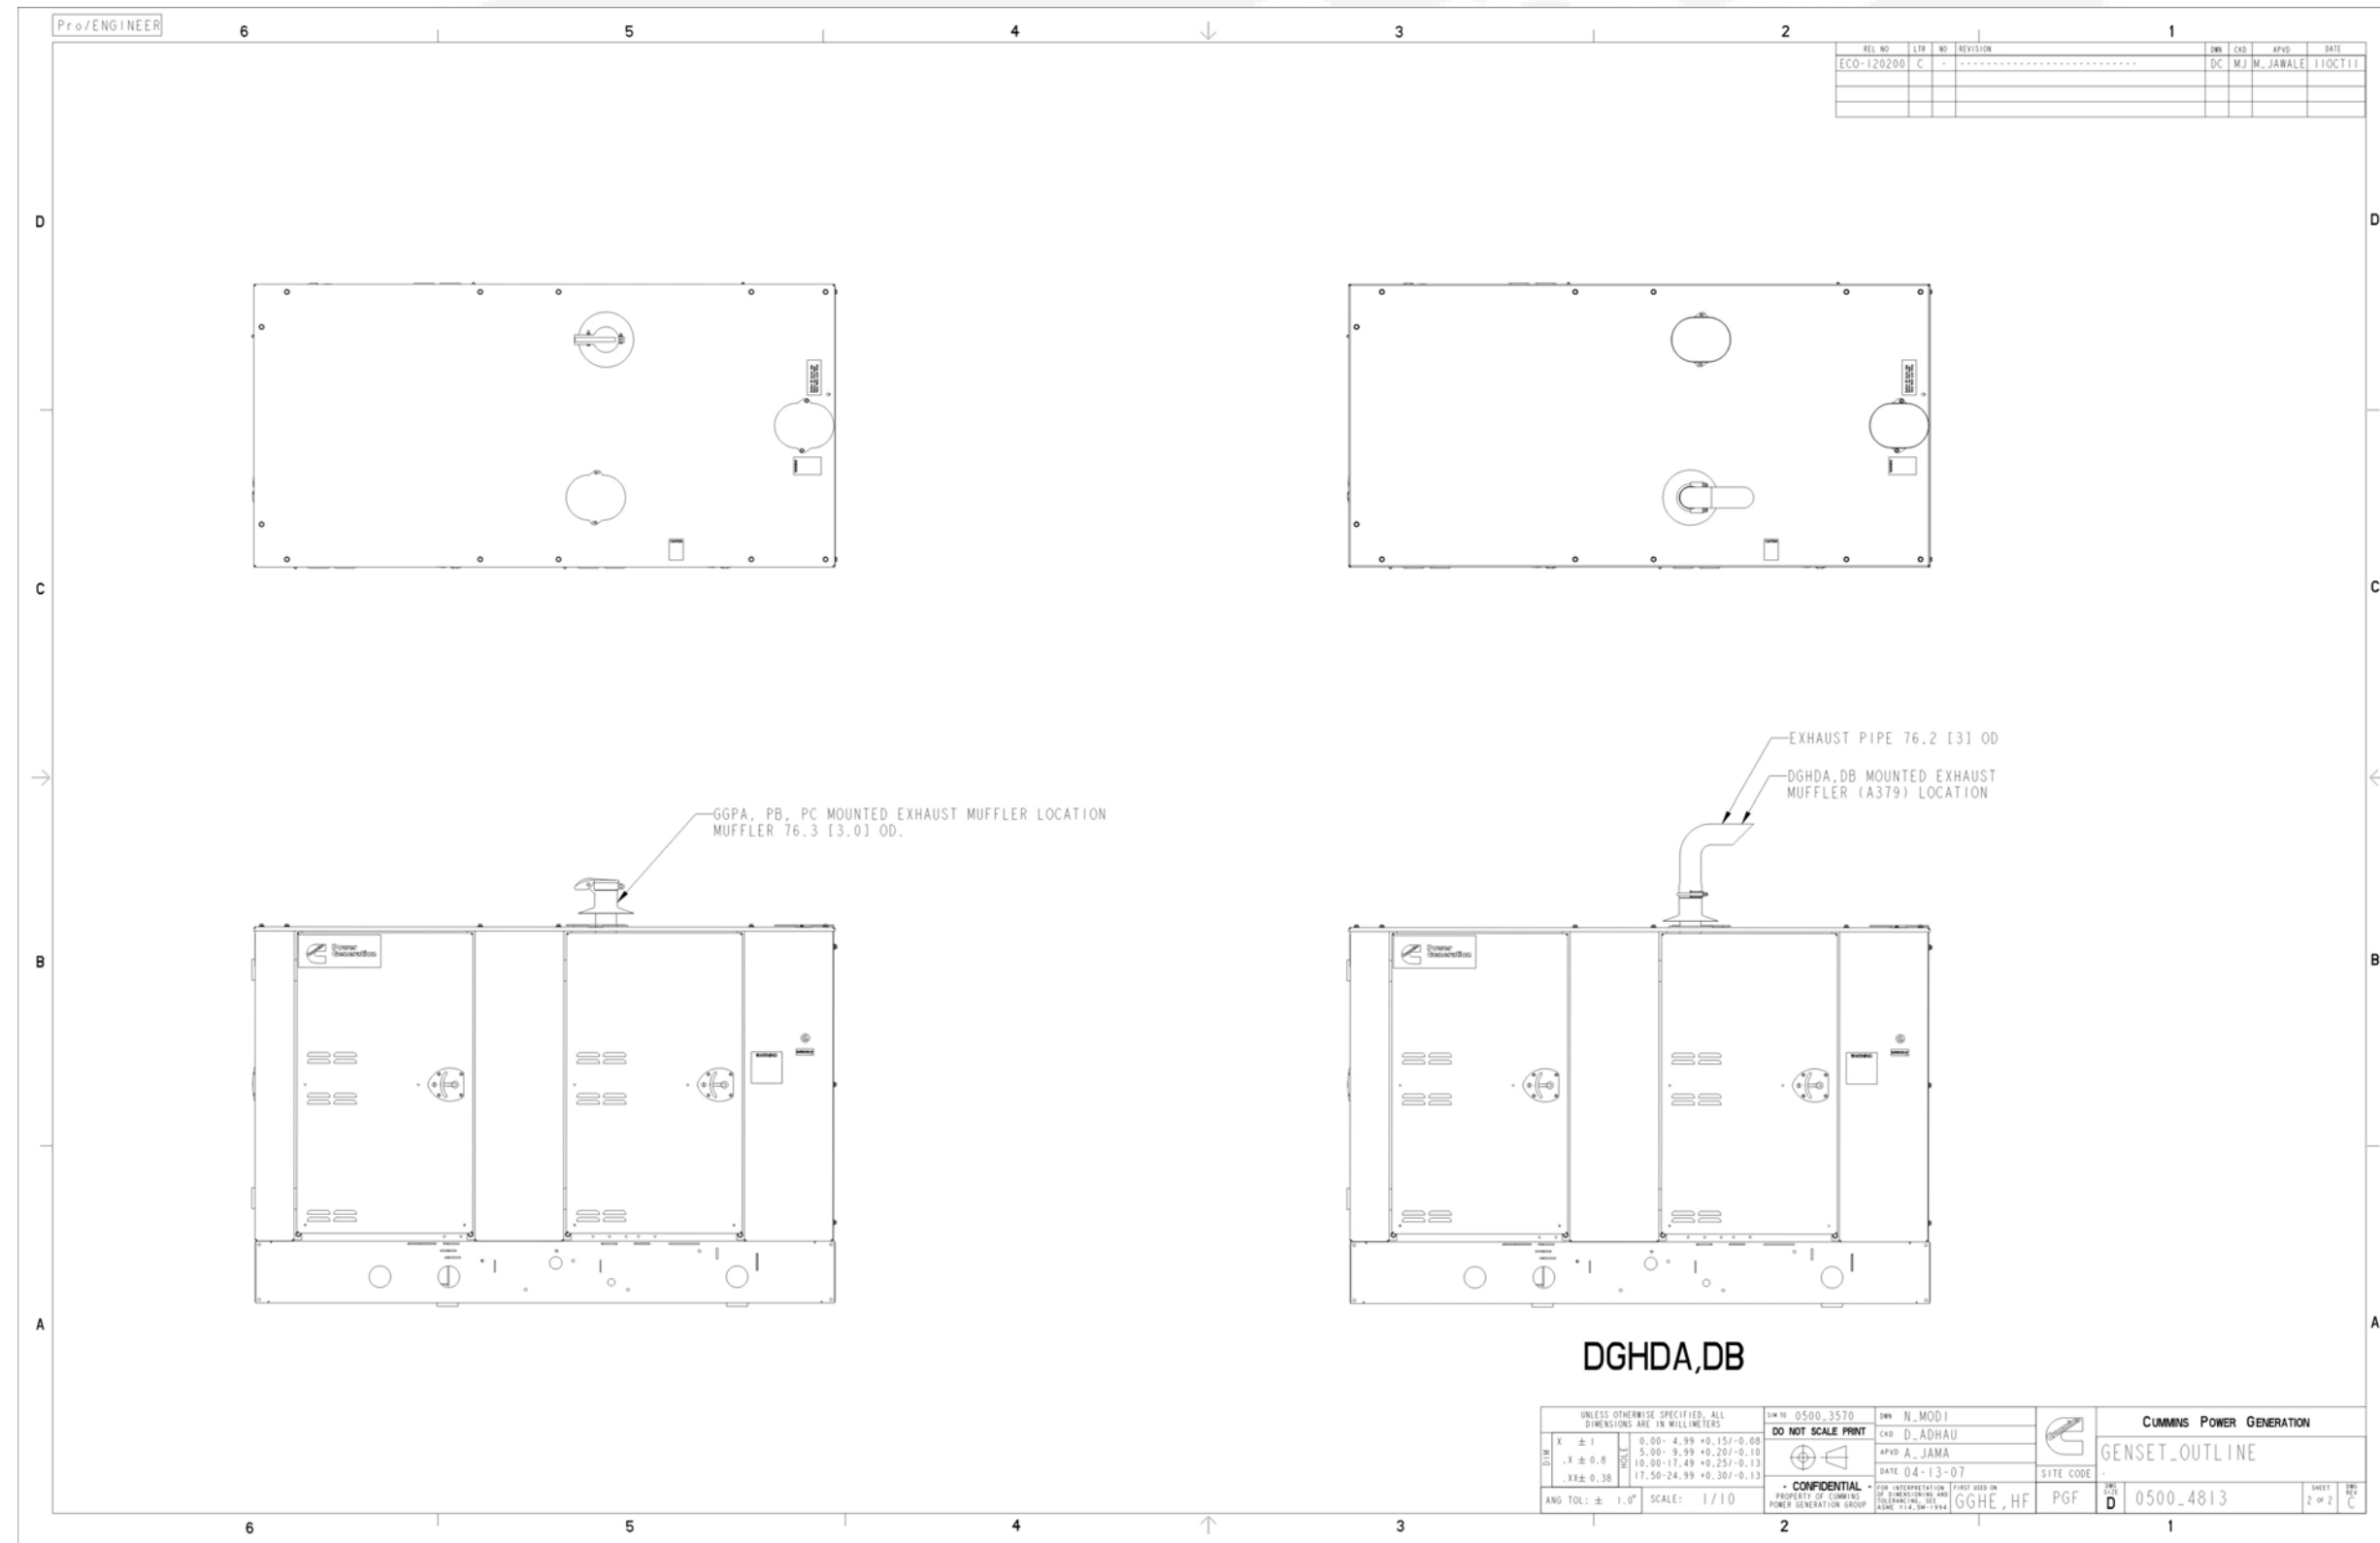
OUTLINE DRAWING (0500-4813 SHEET 2)
